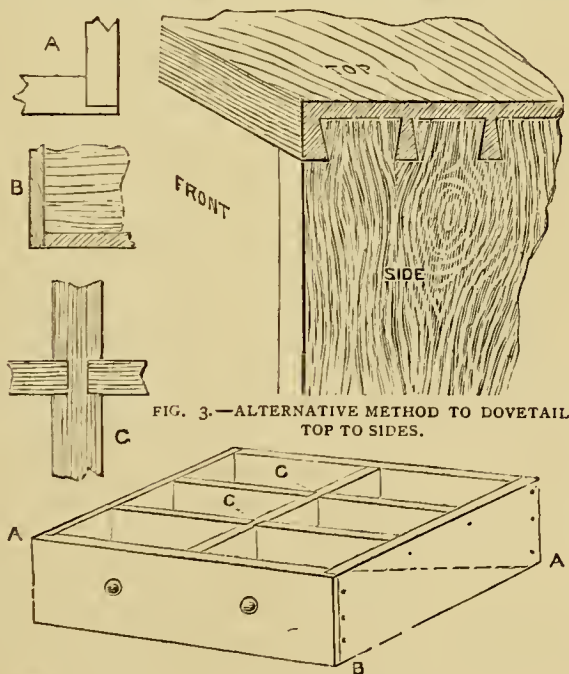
DRAWERS, WITH SECTIONAL DETAILS AT A, B, AND C.
